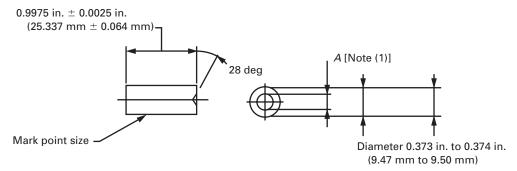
Penetration Gage Assembly for Cross Tip Screwdriver
